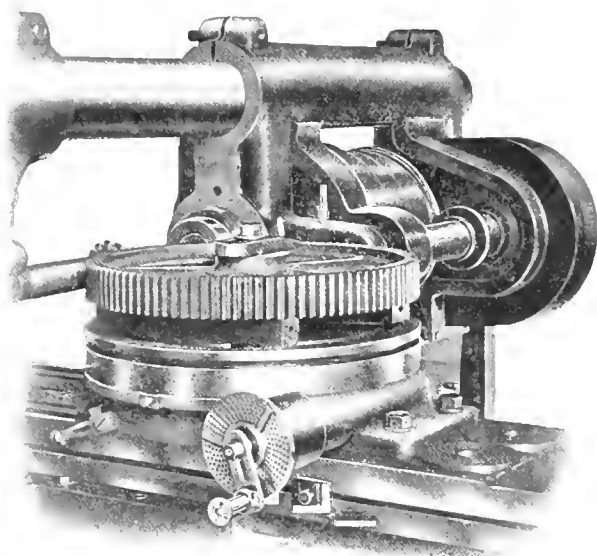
Circular Milling Attachment with Indexing Arrangement, used for Cutting Large Spur Gears.
